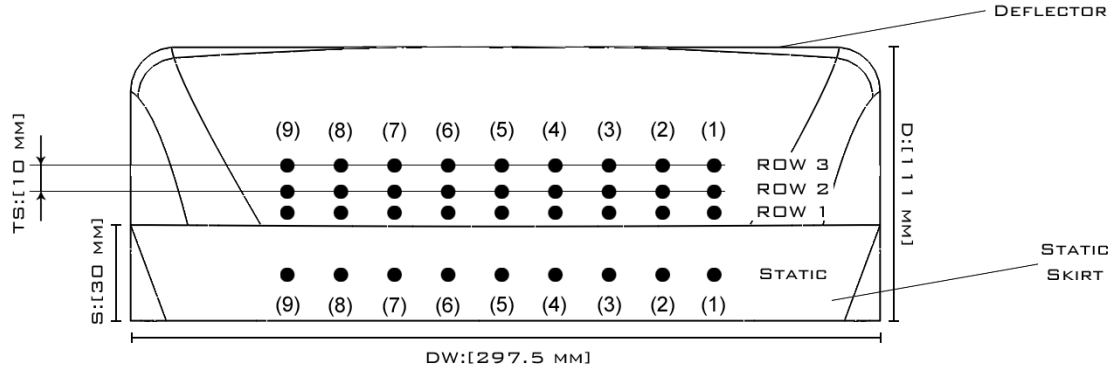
Technical Drawing of Deflector Pressure Tapping Locations.
